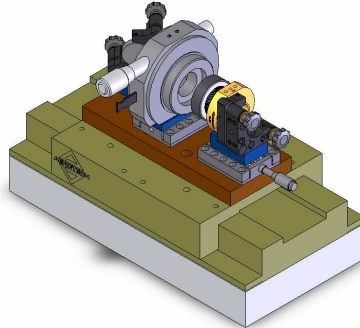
Detail of the 3D CAD design view of beam scan sub-assembly.
